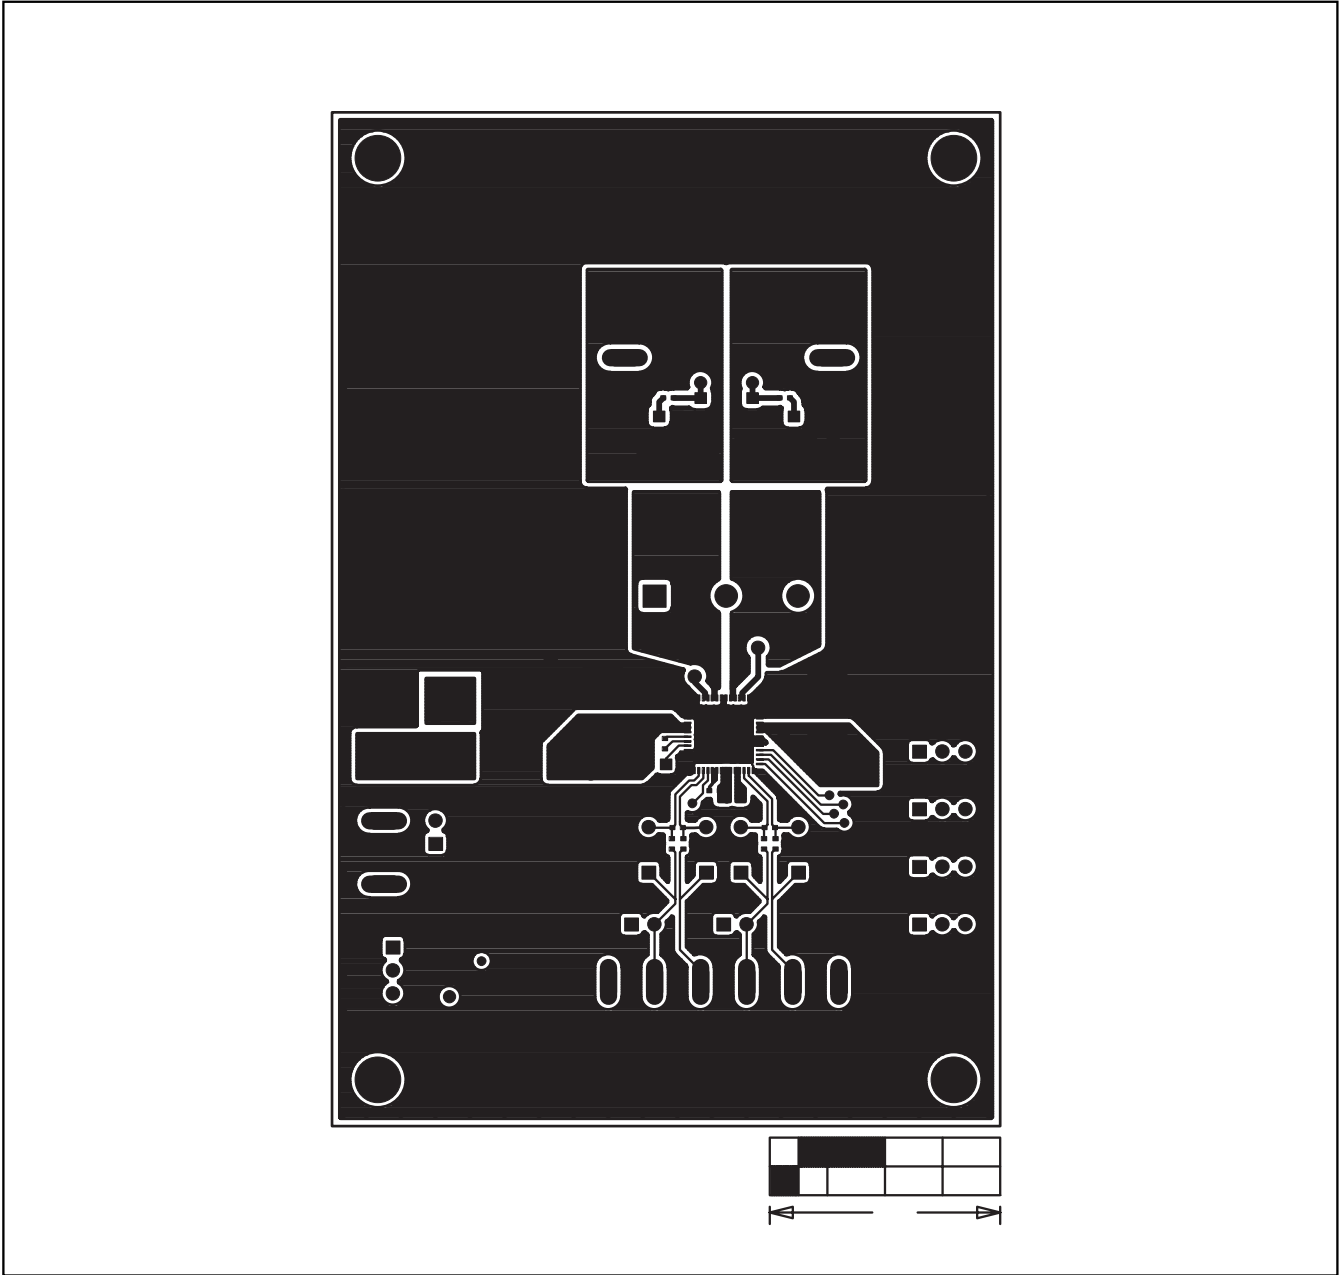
MAX9741 EV Kit PC Board Layout—Component Side
